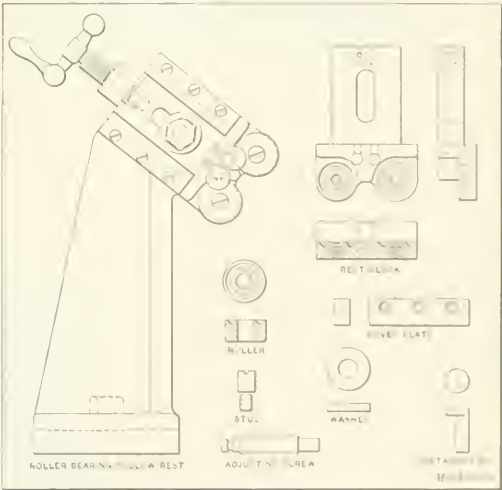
Roller Follow-rests for Use on Engine Lathes
